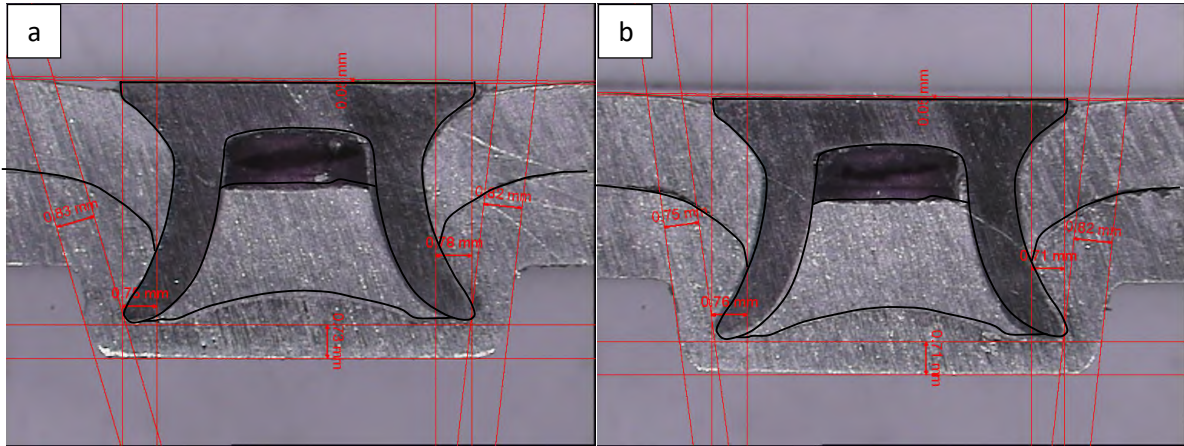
Cross section of (2+2)AA5754 SPR joints with the bottom surface of the top sheet impressed by a medium ring and garnet particles, a) with particles removed, and b) with particles remained.
